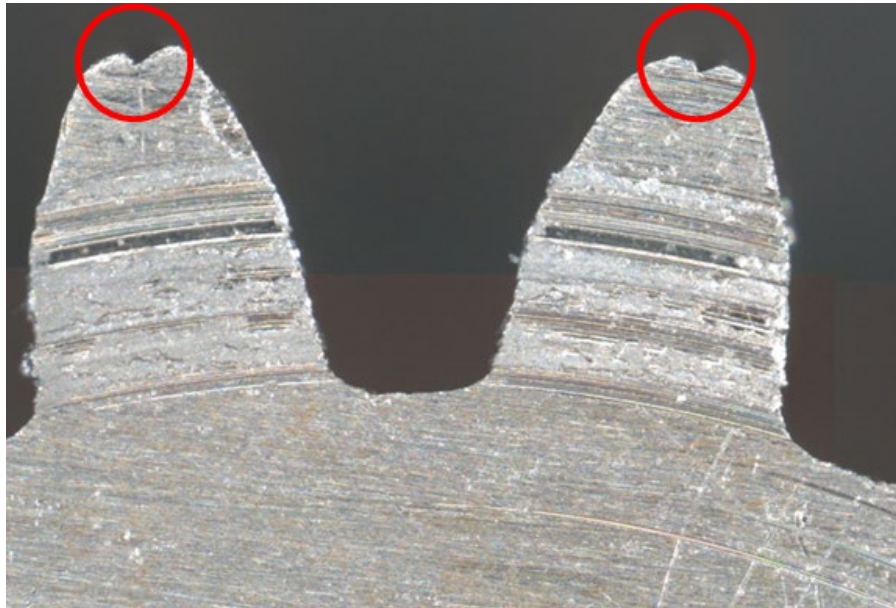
Tip damage in tooth top lands due to pressure spikes in gear meshing
